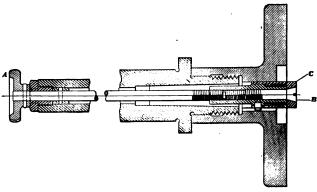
Section through headstock spindle (B. & S.), showing mechanism which operates face chuck. This chuck holds such work as thin cutters, saws, washers, etc. by means of an expansion bushing C which is expanded by the screw B and drawn tightly against the face plate by turning the knob A. Different sizes of bushings may be quickly substituted.
